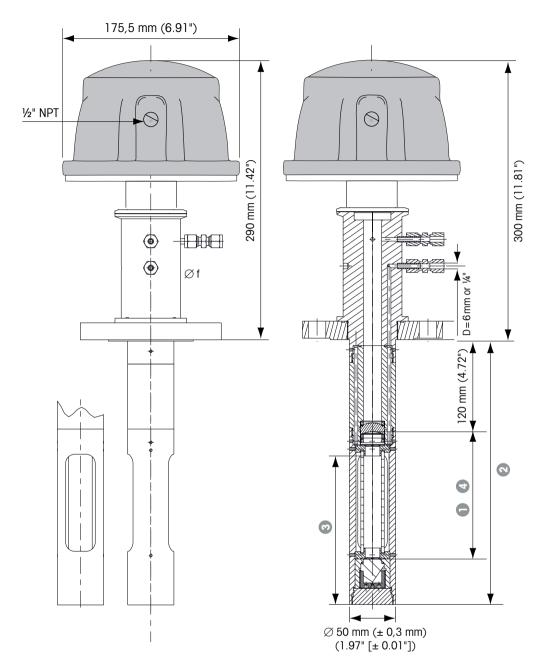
Dimensions of the non-purged probe (B) with Block-Back.
